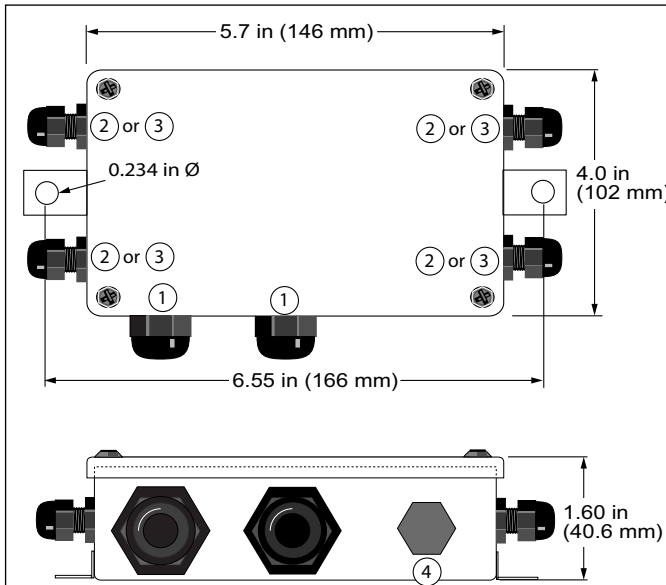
JB4ES and JB4SS Enclosure Dimensions
